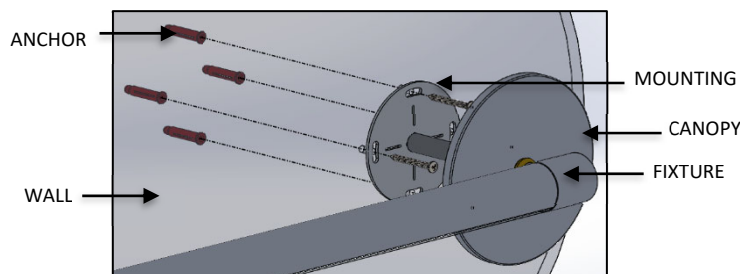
FIXTURE INSTALLATION ON OTHER END
